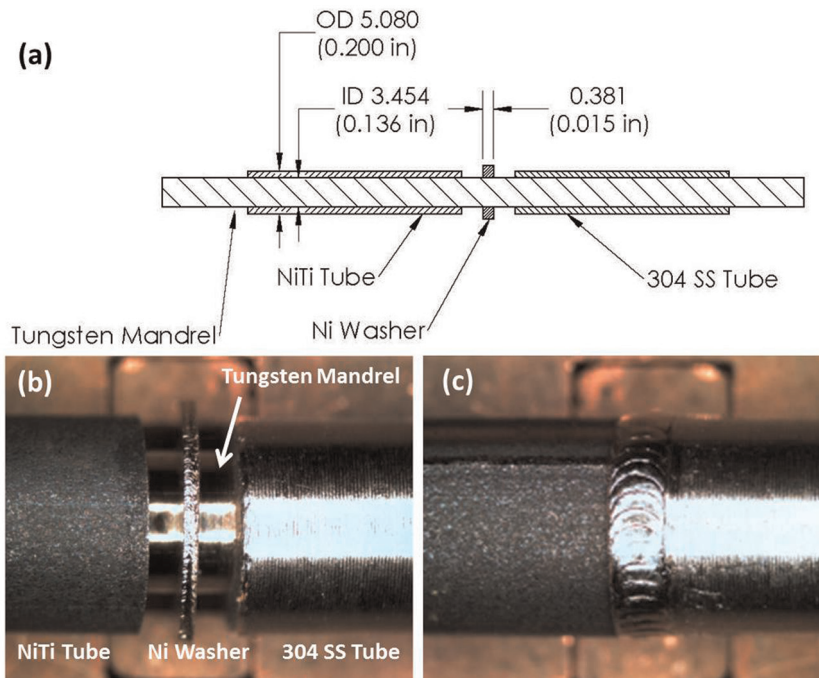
(a) Exploded diagram of NiTi/304 SS pilot laser weld, (b) pilot joint assembled preweld, and (c) laser pilot weld.
